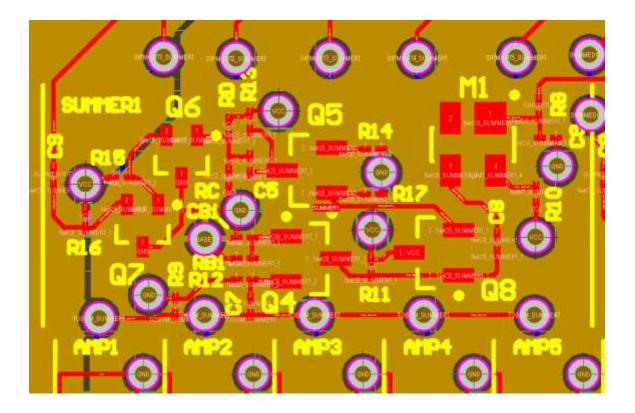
Close-up CAD Drawing of Summing Circuit SUMMER1 on the Amplifier Board
